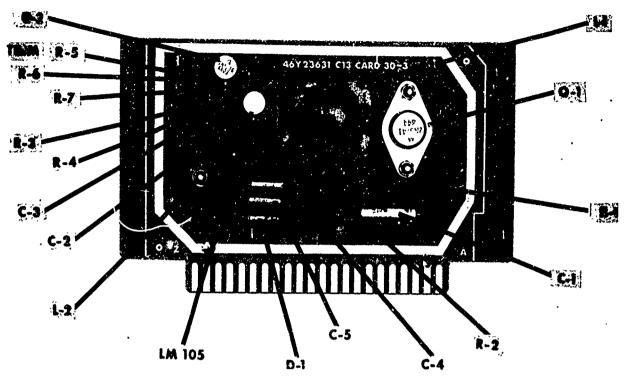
Board 30 (cont.). Board 30-3. 350-mA switching regulator.
